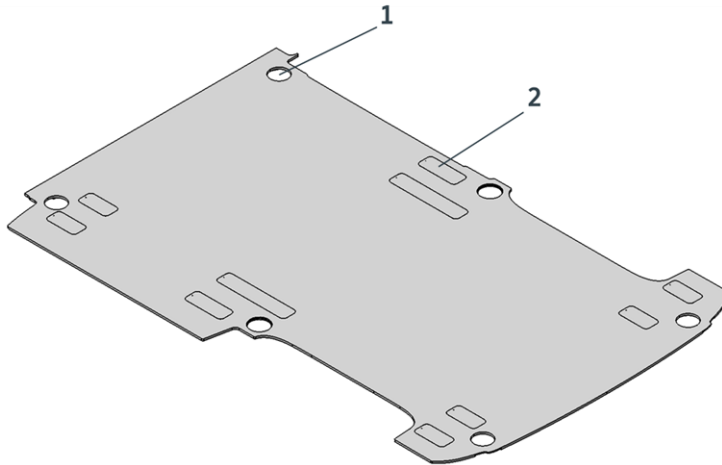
Universal floor (5BM); shown here: Transporter with a short wheelbase and a right-hand sliding door
